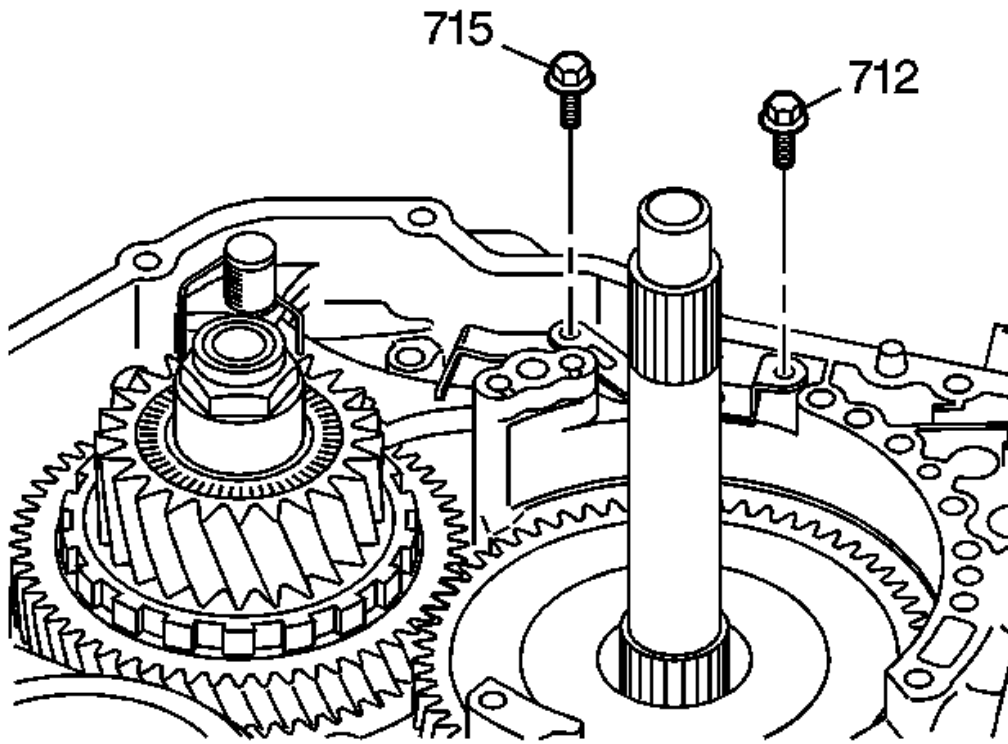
Identifying Manual Shift Detent Lever with Shaft Position Switch
